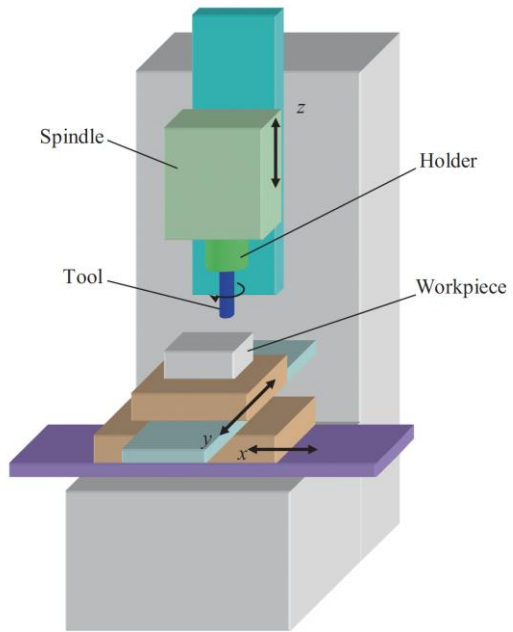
Visual representation of a vertical spindle machine tool design [1].
